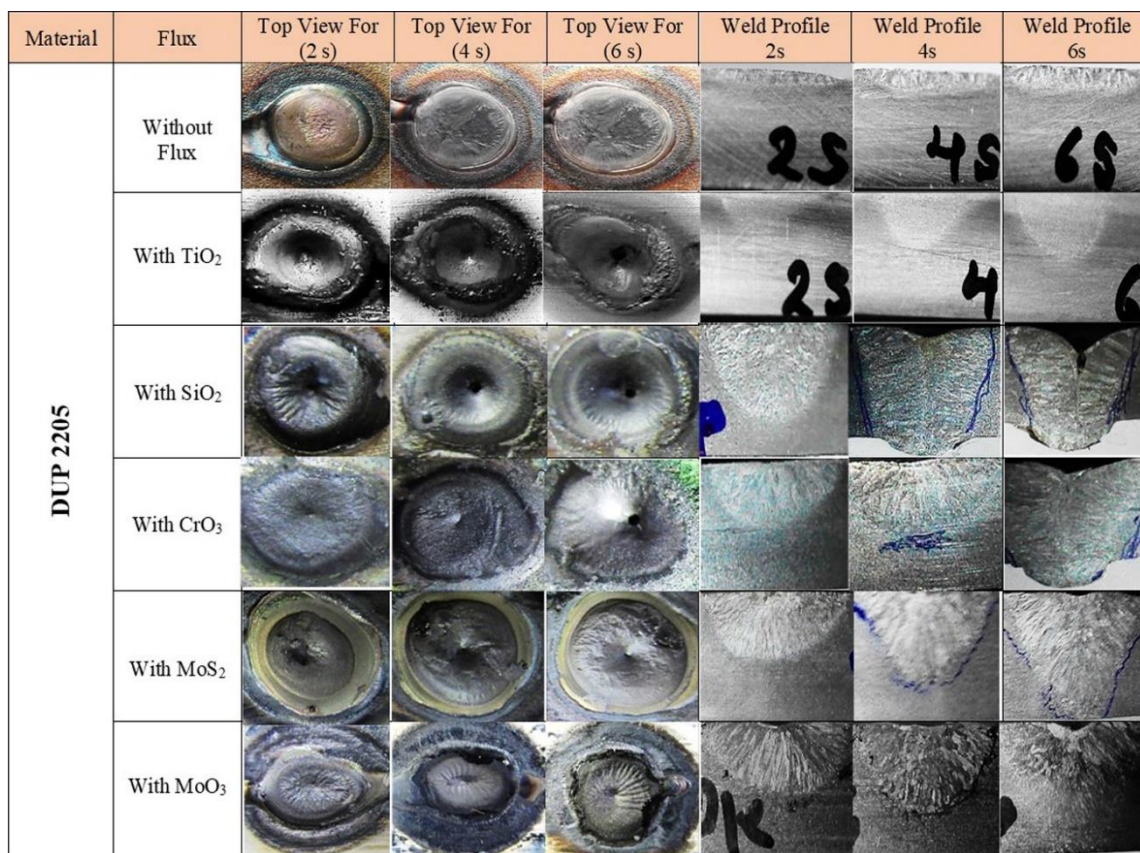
16: Showing the top surface and penetration of TIG and A-TIG welding of Duplex 2205 at different arc exposure times using Ar shielding
